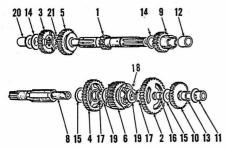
Exploded view of M31 three speed transmission. Bushing (11) has an open end, bushing (20) has a closed end.
